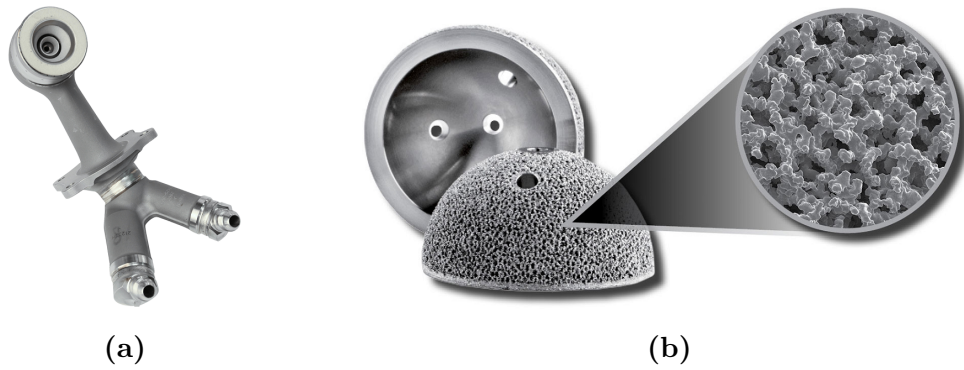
a) Additively manufactured fuel nozzle for General Electric LEAP Engine [3]. A single AM part replaced an assembly of 20 conventionally manufactured components, with 25% reduction in weight. b) An orthopaedic implant built by electron-beam welding incorporating an optimised porous surface for improved integration with human bone [4]
